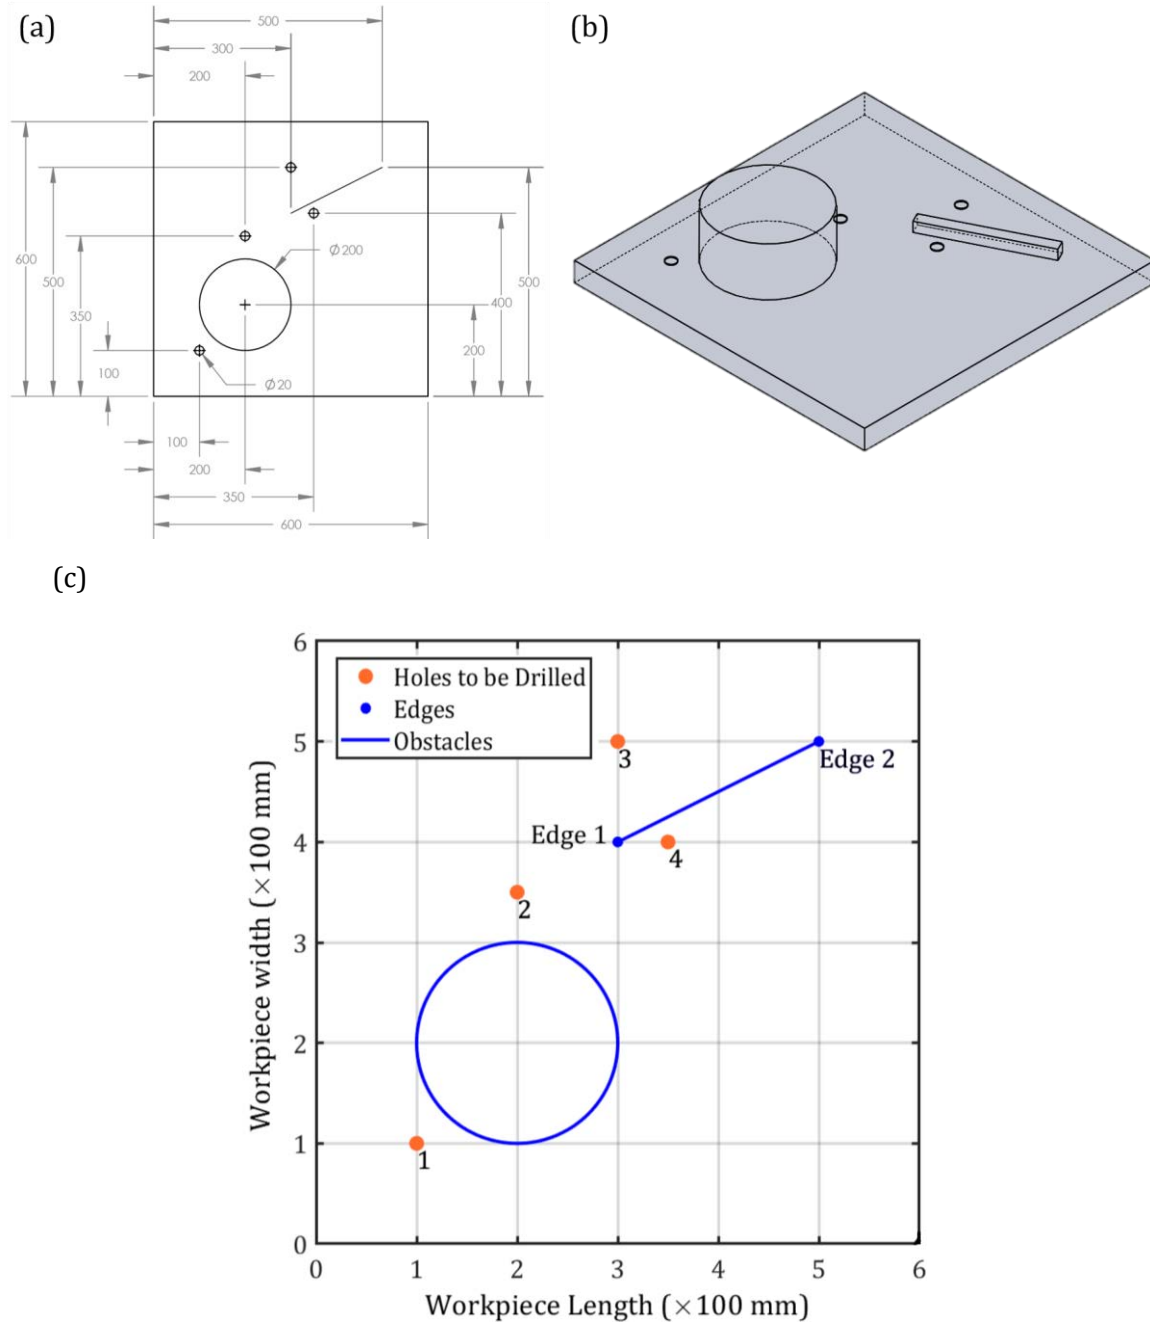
4-hole drilling workpiece dimensions and arrangement of holes and obstacles (edges), (a) 2D drawing; (b) Isometric view (c) MATLAB figure (all dimensions are in mm)
